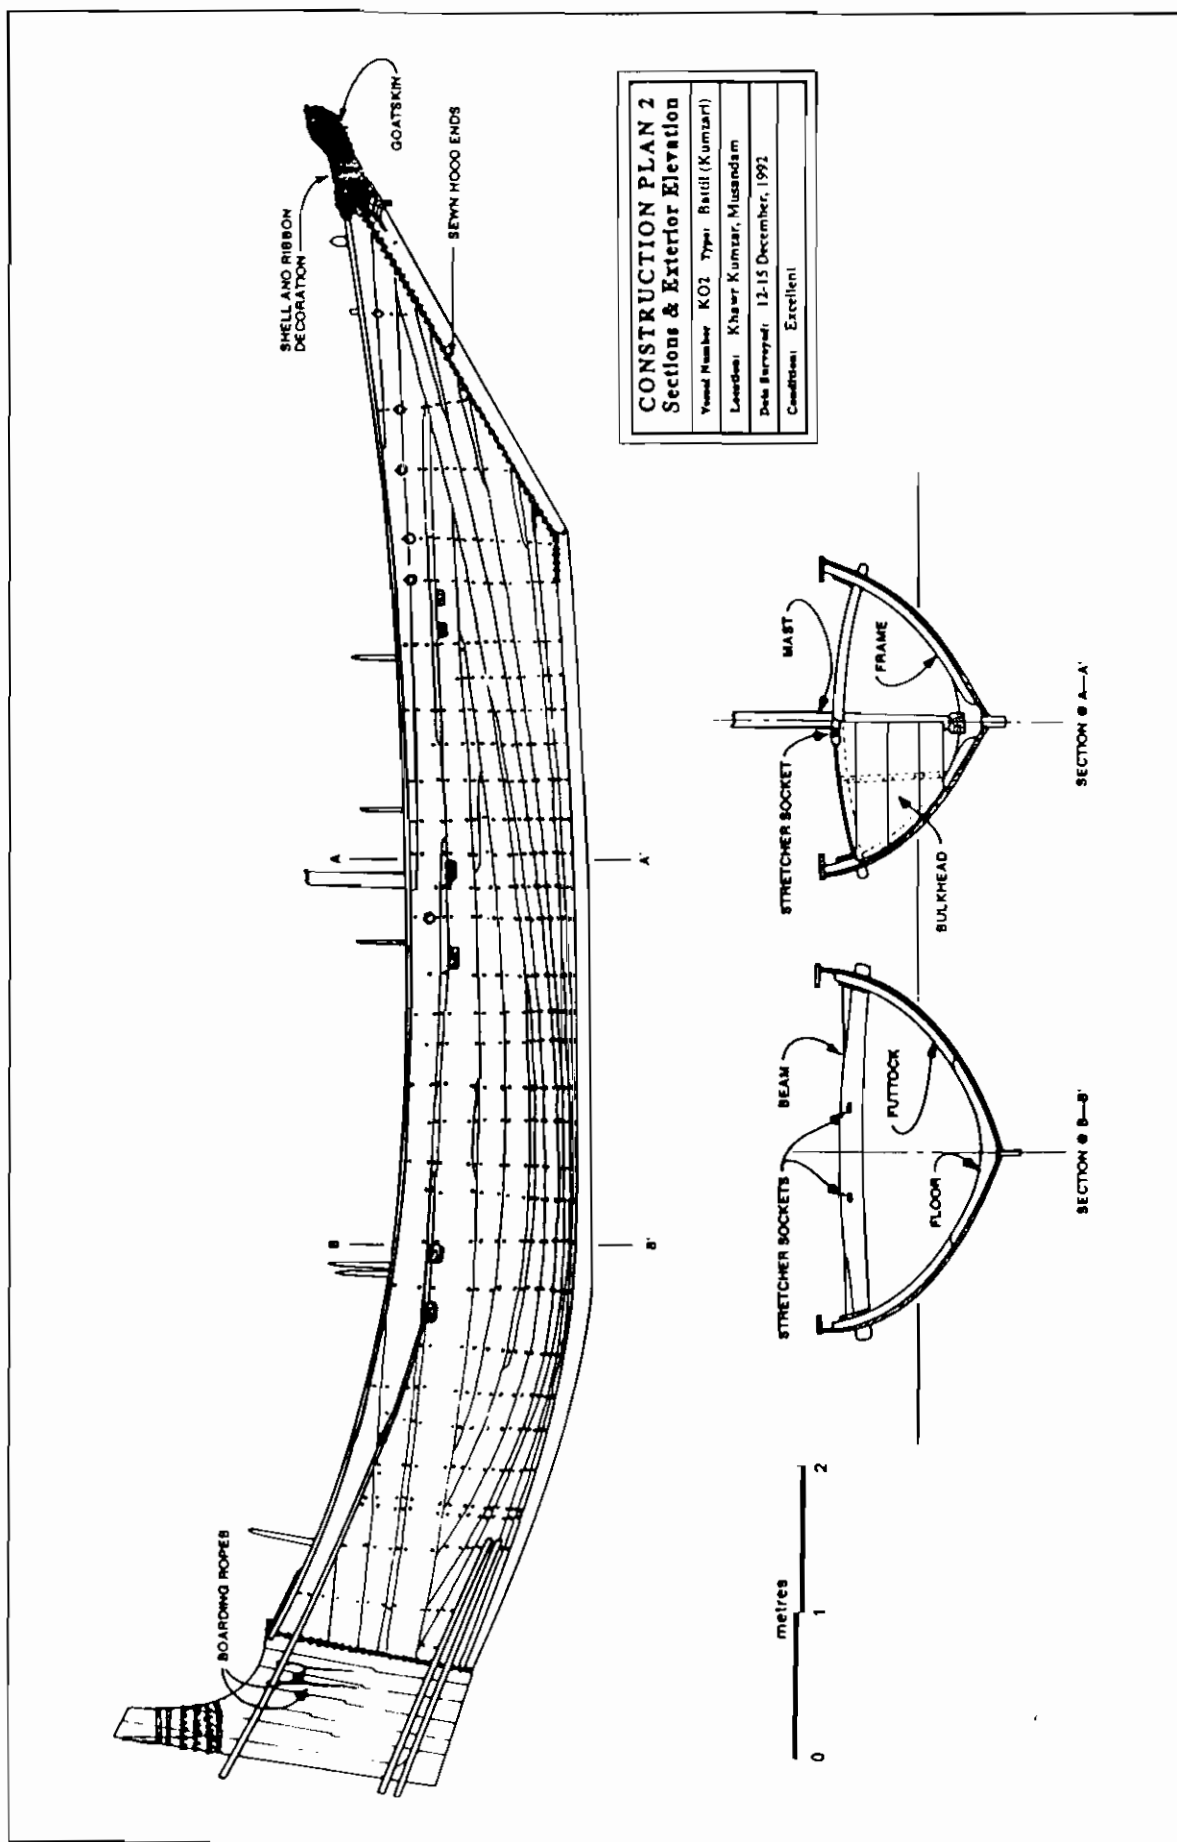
Exterior elevation and interior sections of Kumzari battil KO2.
